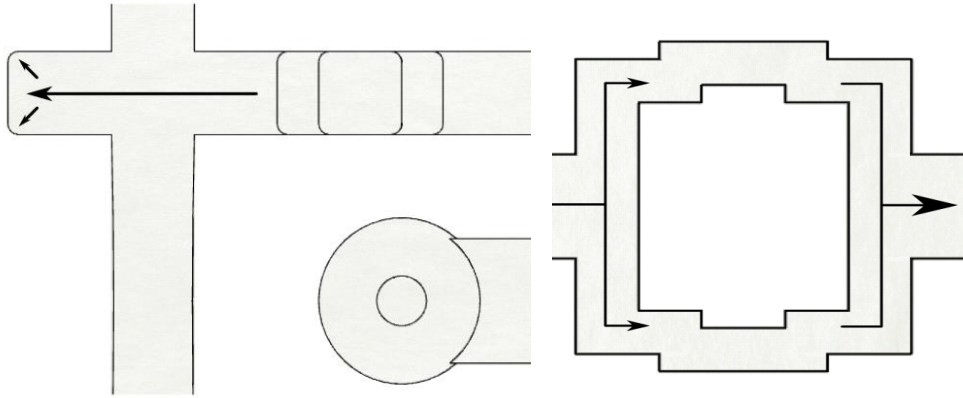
Incorporation of dead branches (left) and obstacles to form a weld line (right) into new testing mold design
